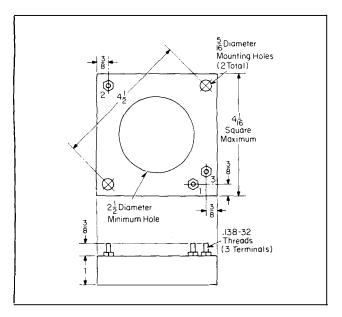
Mounting Dimension for S# 179C768H01, H02
